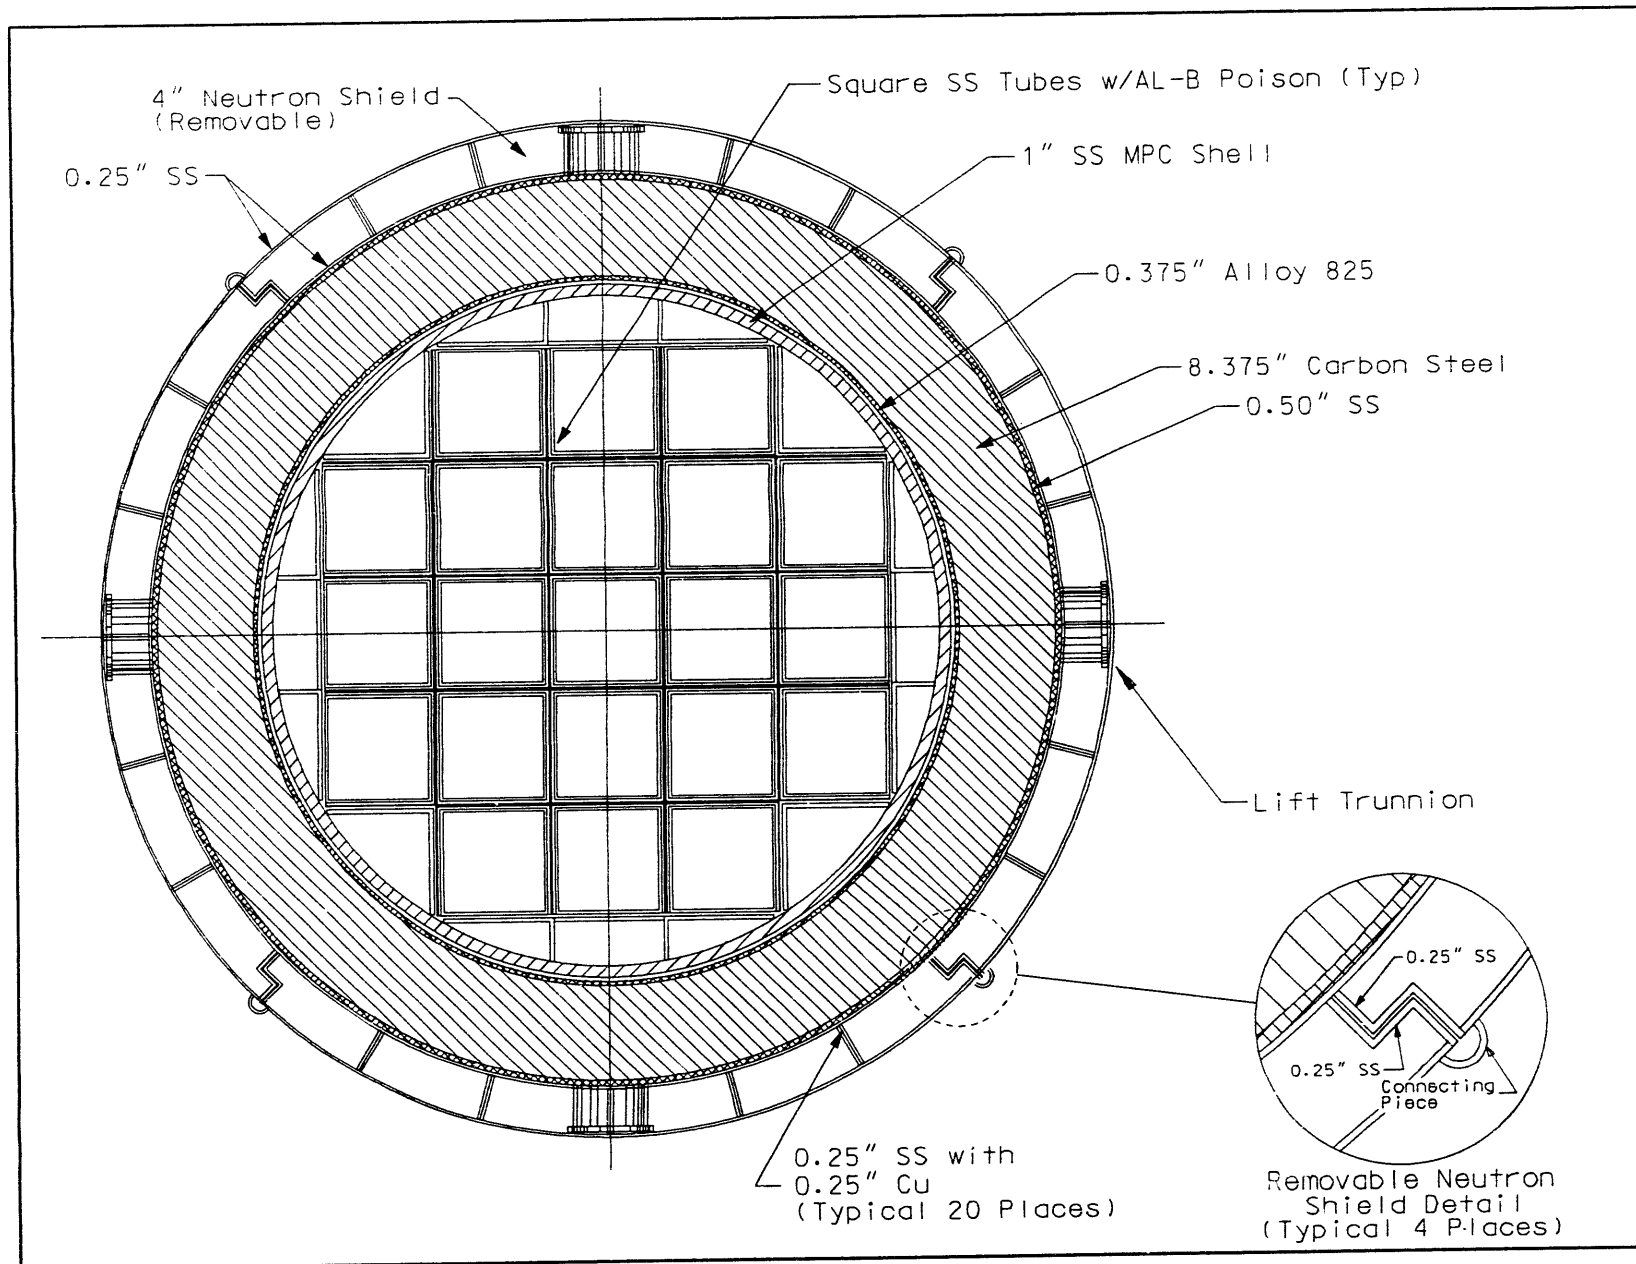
125-Ton MPU For 21 PWR Fuel Assemblies (End Section View)
